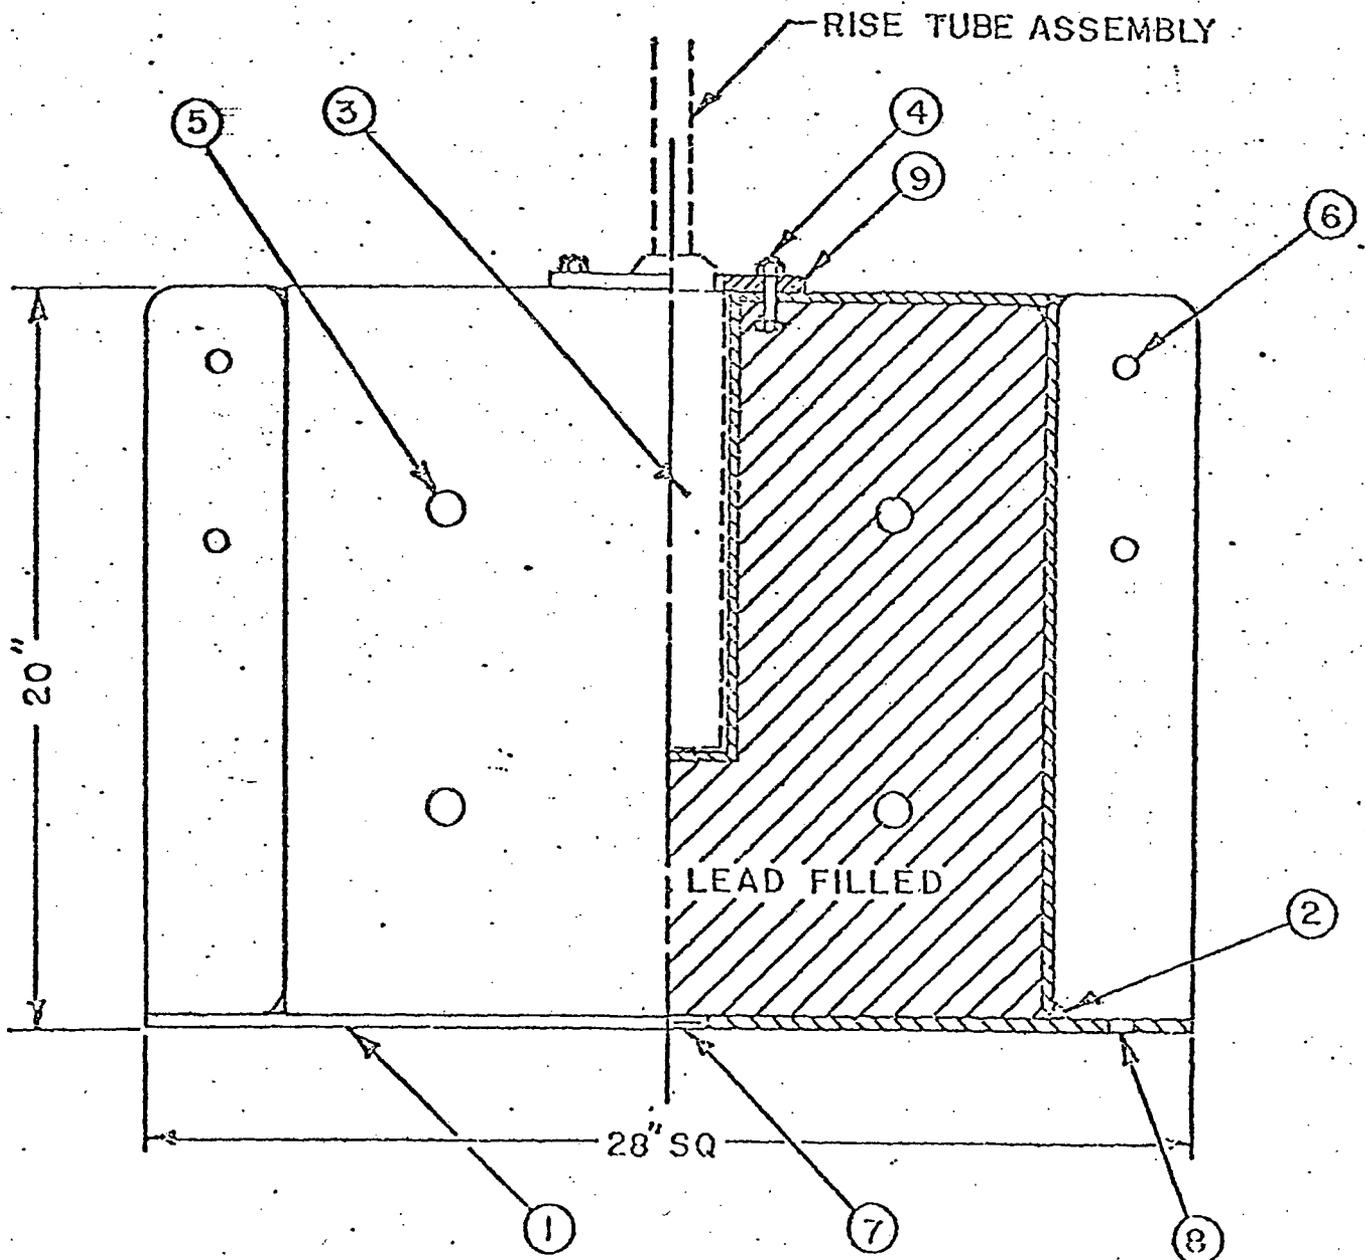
PRIMARY SOURCE STORAGE SHIELD
